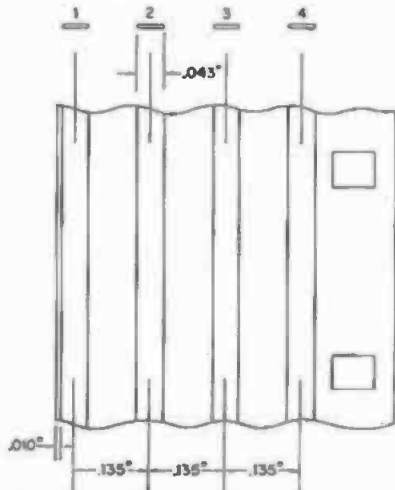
C. Sound-track placement dimensions using four tracks on a 16-mm magnetic film.
